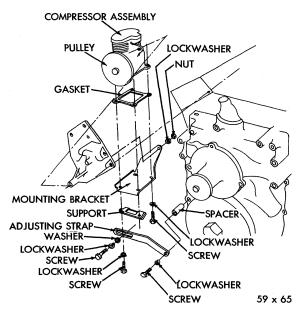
Compressor Mounting (with Air Conditioning — Model MC-1)
